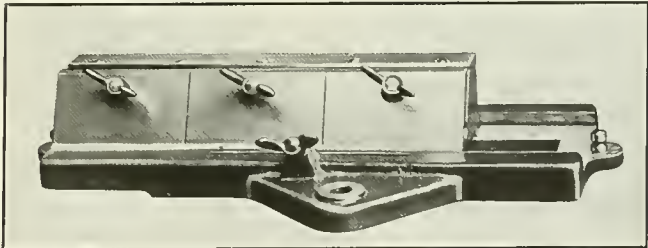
Fixture used on Gorton Engraving Machine having Simple Clamps which a line of letters is engraved. It was necessary to provide a clamp for holding the sliding block to the base.
